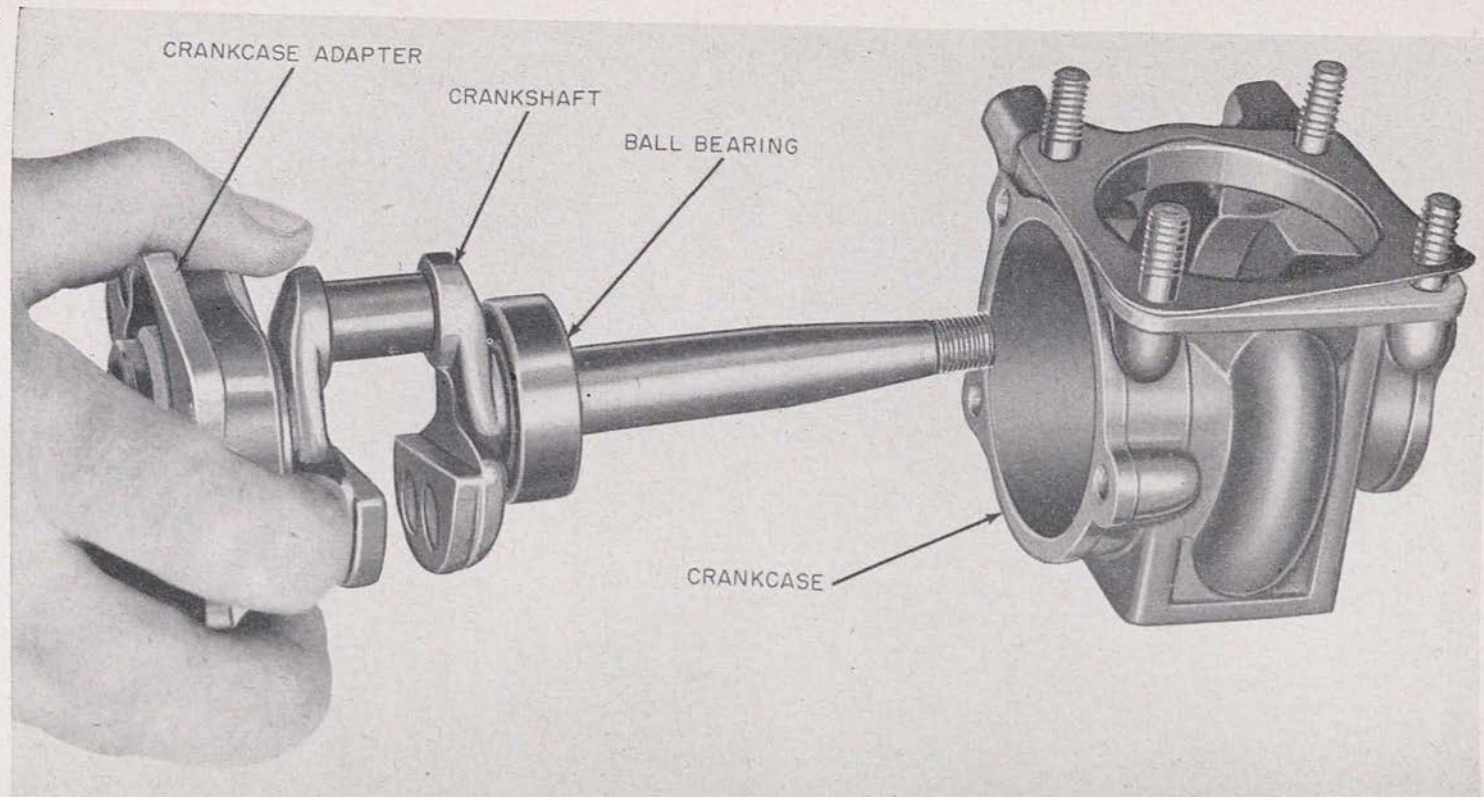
Crankcase adapter, crankshaft, and crankshaft bearing, removed from crankcase.
